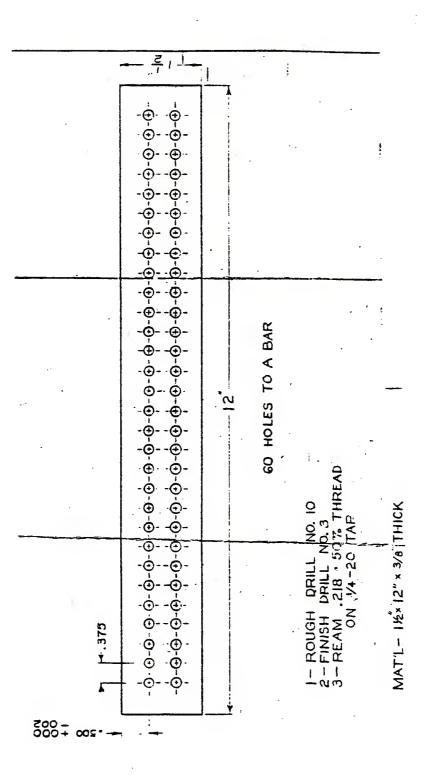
WORKPIECE DRAWING AND SPECIFICATION
